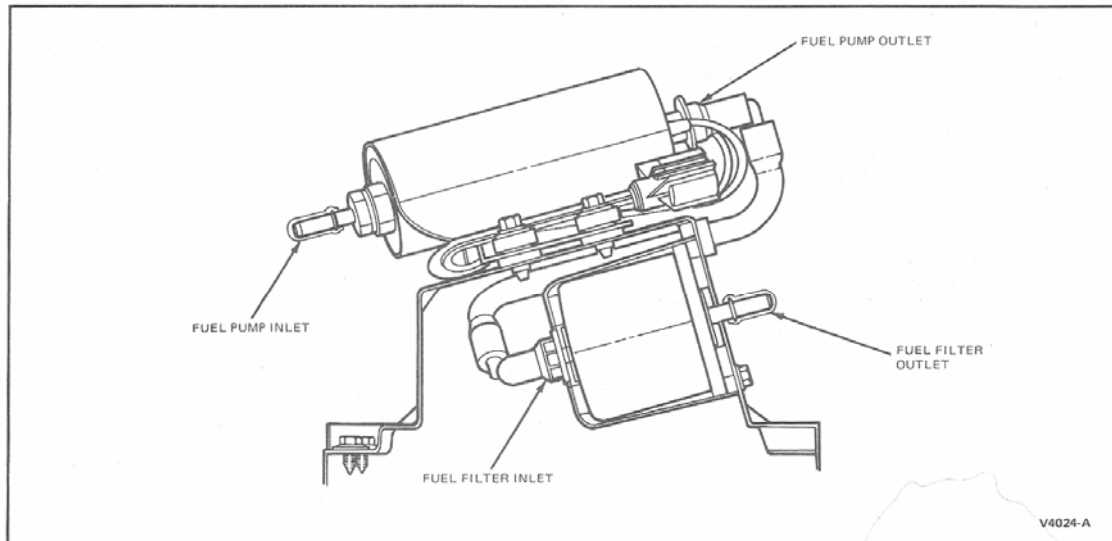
Fuel Filter, In-Line and Fuel Pump Assembly—Typical
